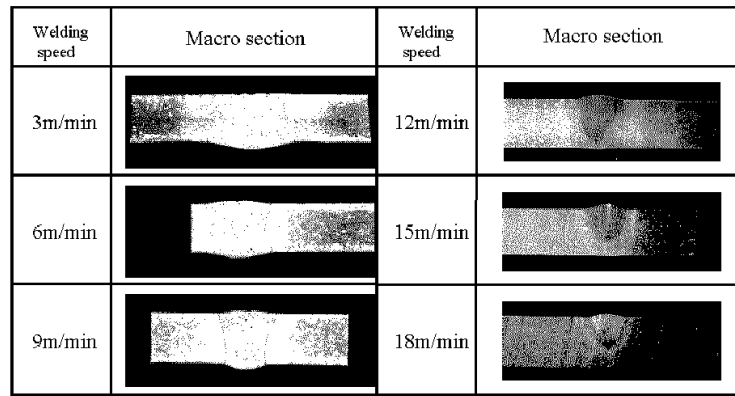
Cross section of laser weld of A6N01 alloy with Al-12Si base filler metal
